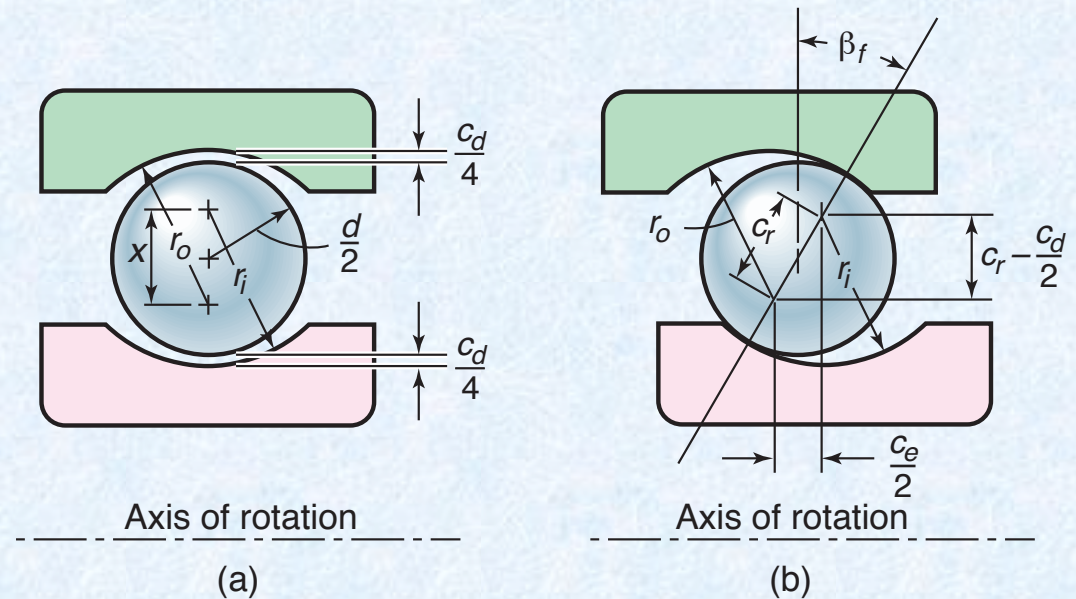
Cross-section of radial bearing, showing ball-race contact due to axial shift of inner and outer races. (a) Initial position; (b) shifted position.
